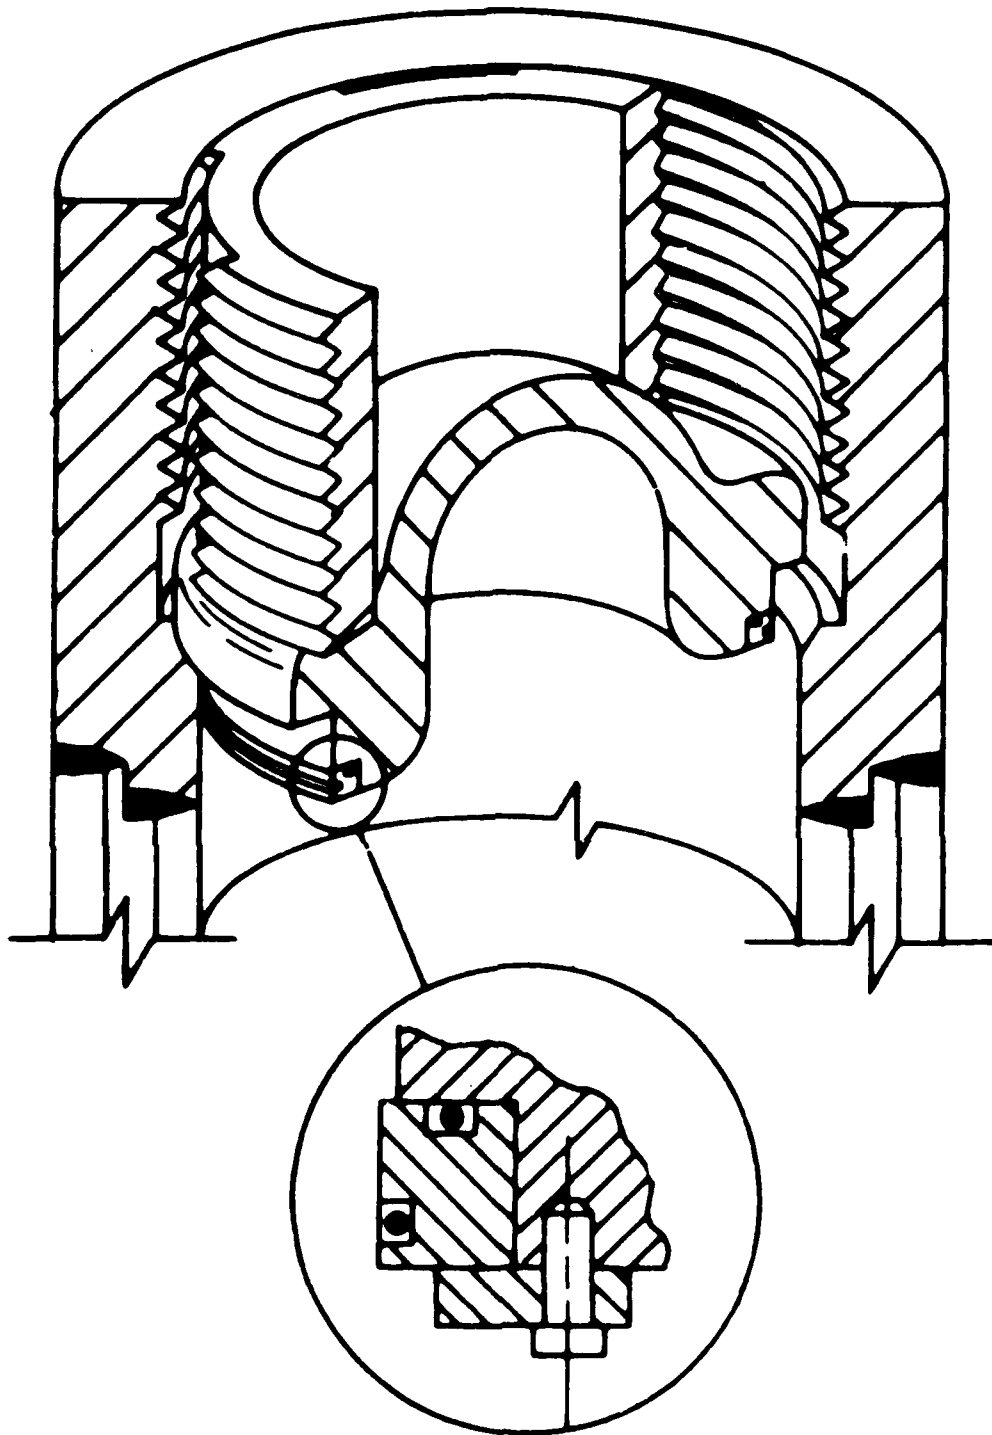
Floating O-Ring Seal, Installed in Tank with Segmented Breach-Yoke Closure
